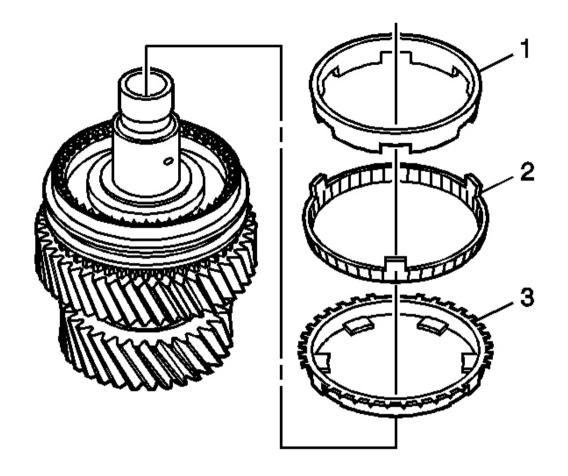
View Of 1st Gear Cones & Blocking Ring Courtesy of GENERAL MOTORS CORP.
